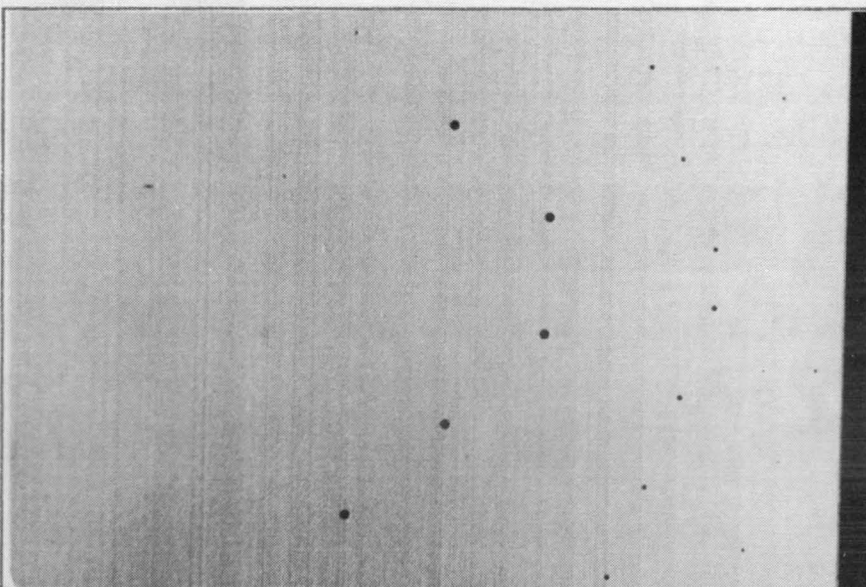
View of orifices formed by wire cutting profile on lower surface
